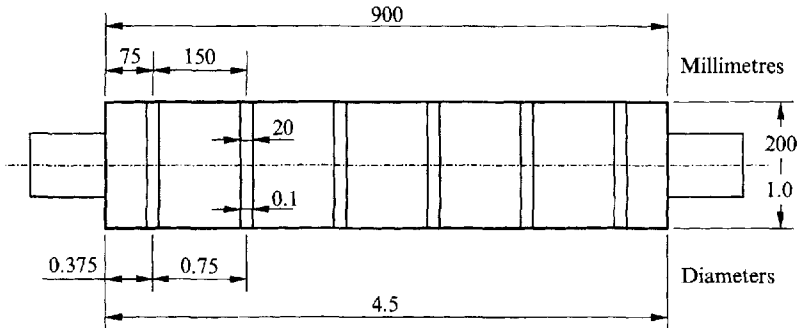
Cylinder assembly showing locations and dimensions of the six lift force transducers. An internal structural cylinder is responsible for the reduced-diameter protrusions at cylinder ends.
